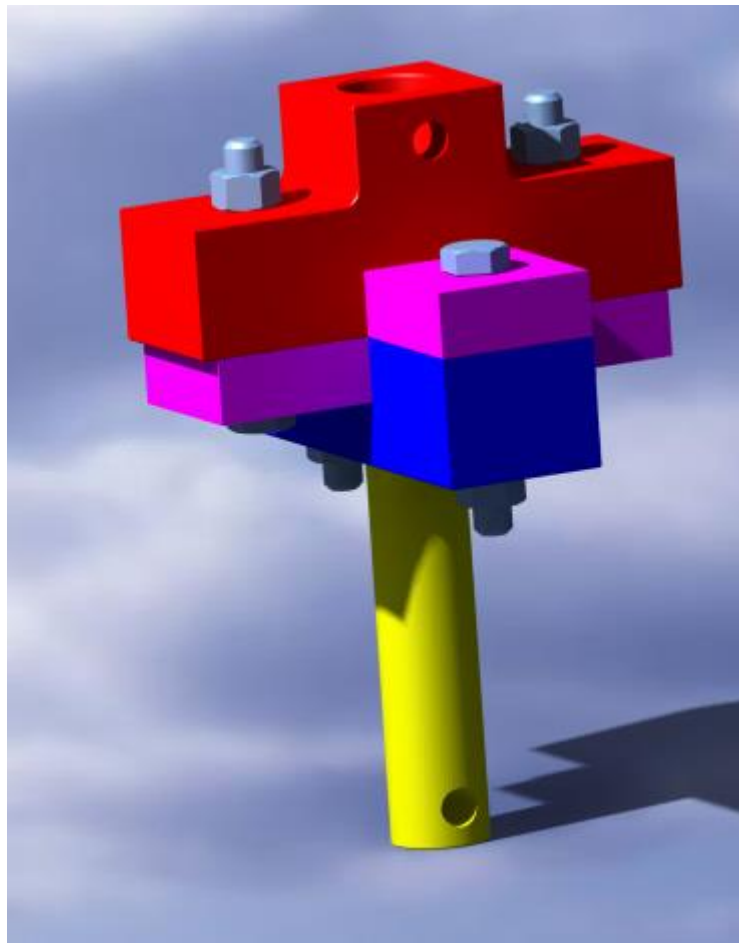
Semi-cylindrical fixture<sup>5</sup>
